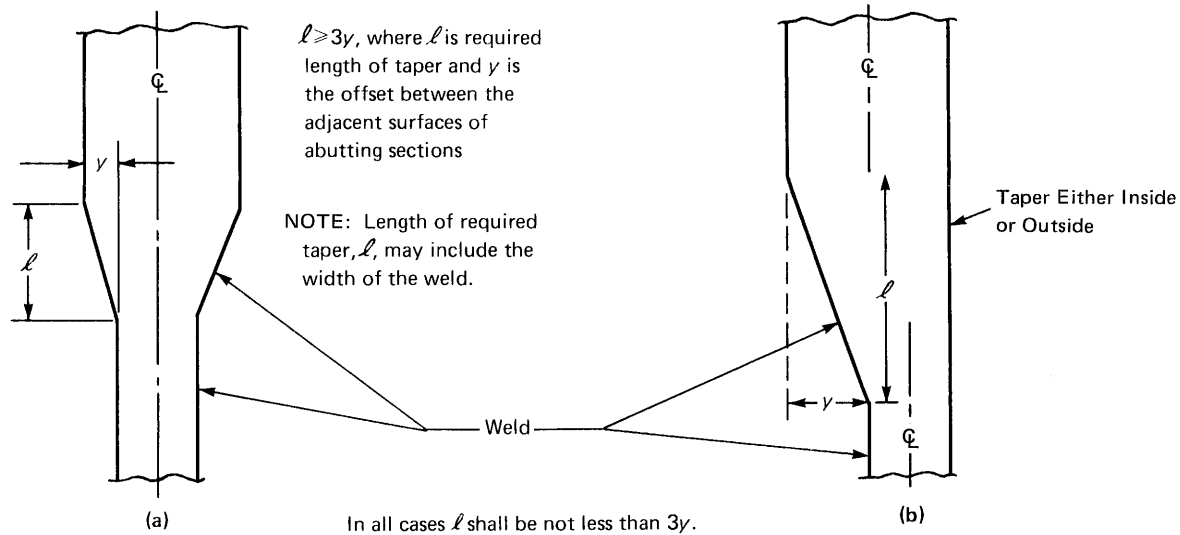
BUTT WELDING OF PLATES OF UNEQUAL THICKNESS
